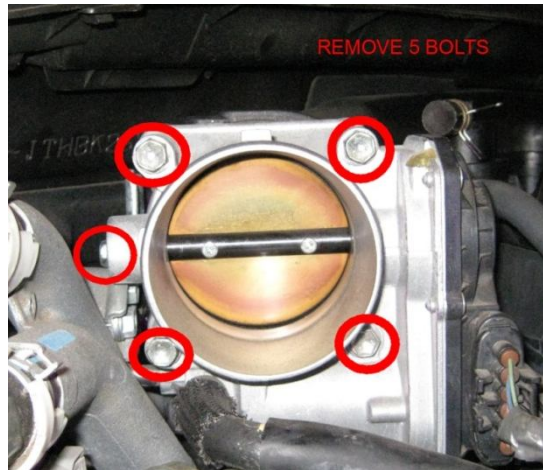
The front view of the throttle body. There are 5 bolts total. You do not need to remove the connector and hoses. Just put the throttle body aside.
